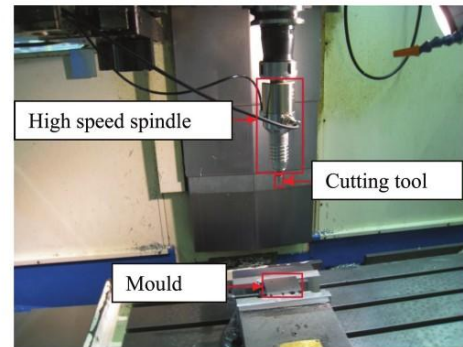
Set-up for micromilling microfluidic mould using a high-speed spindle
